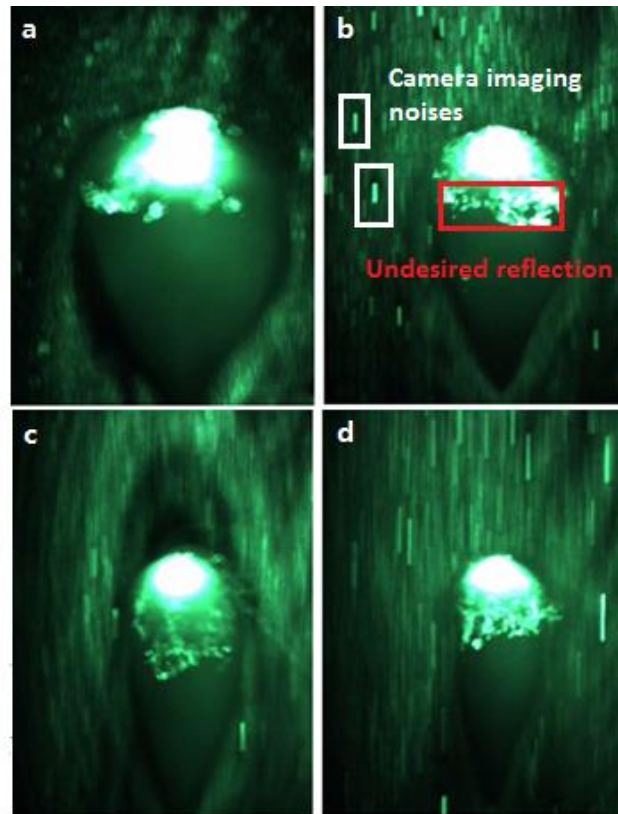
Original images of weld pool under different welding speed (a) 1 m/min (b) 2 m/min (c) 3 m/min (d) 5m/min.
